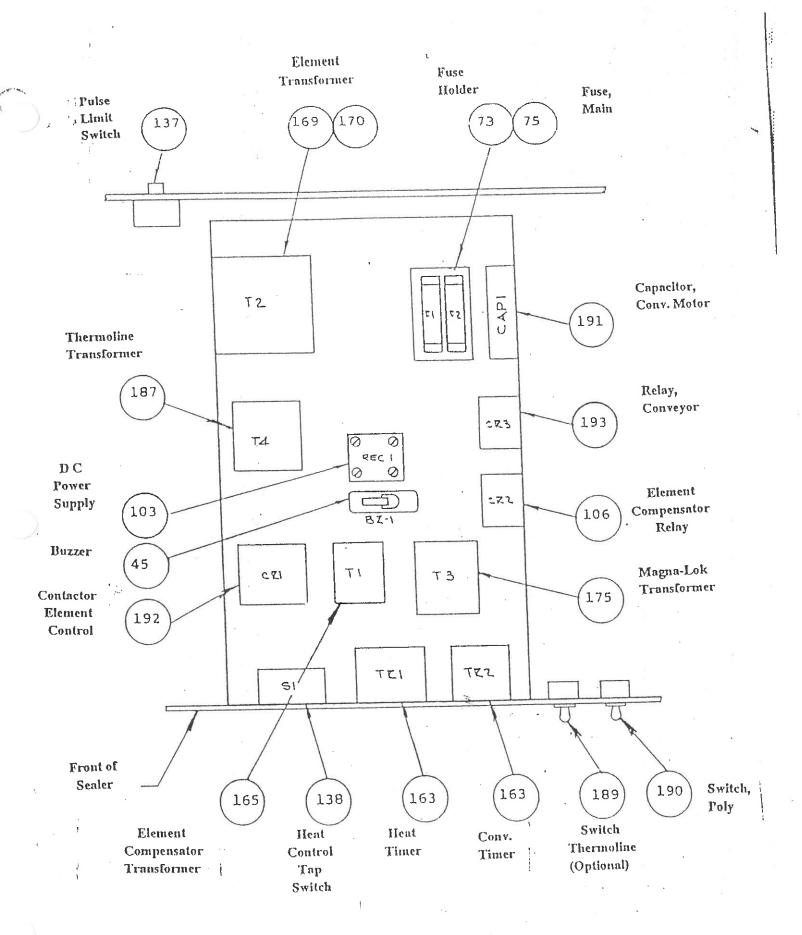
Parts Location, Electrical Chassis Models 6401 and 6402 /
